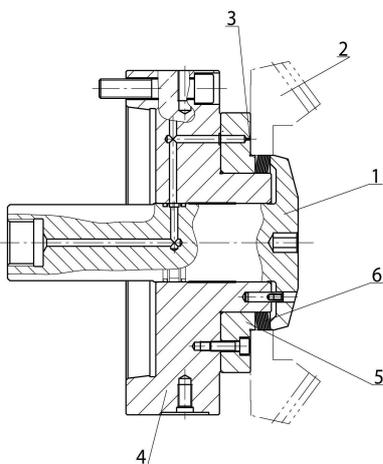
Clamping mandrels used to mill lorry crown gears
